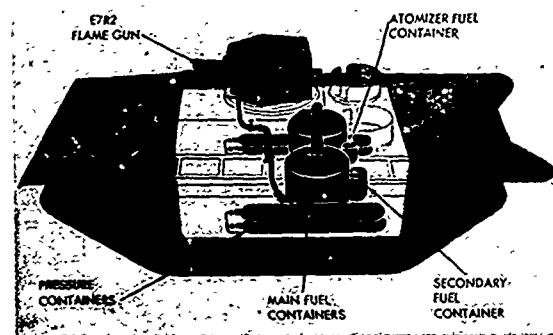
E14-7R2 flame-thrower installation showing position of gun and containers.
